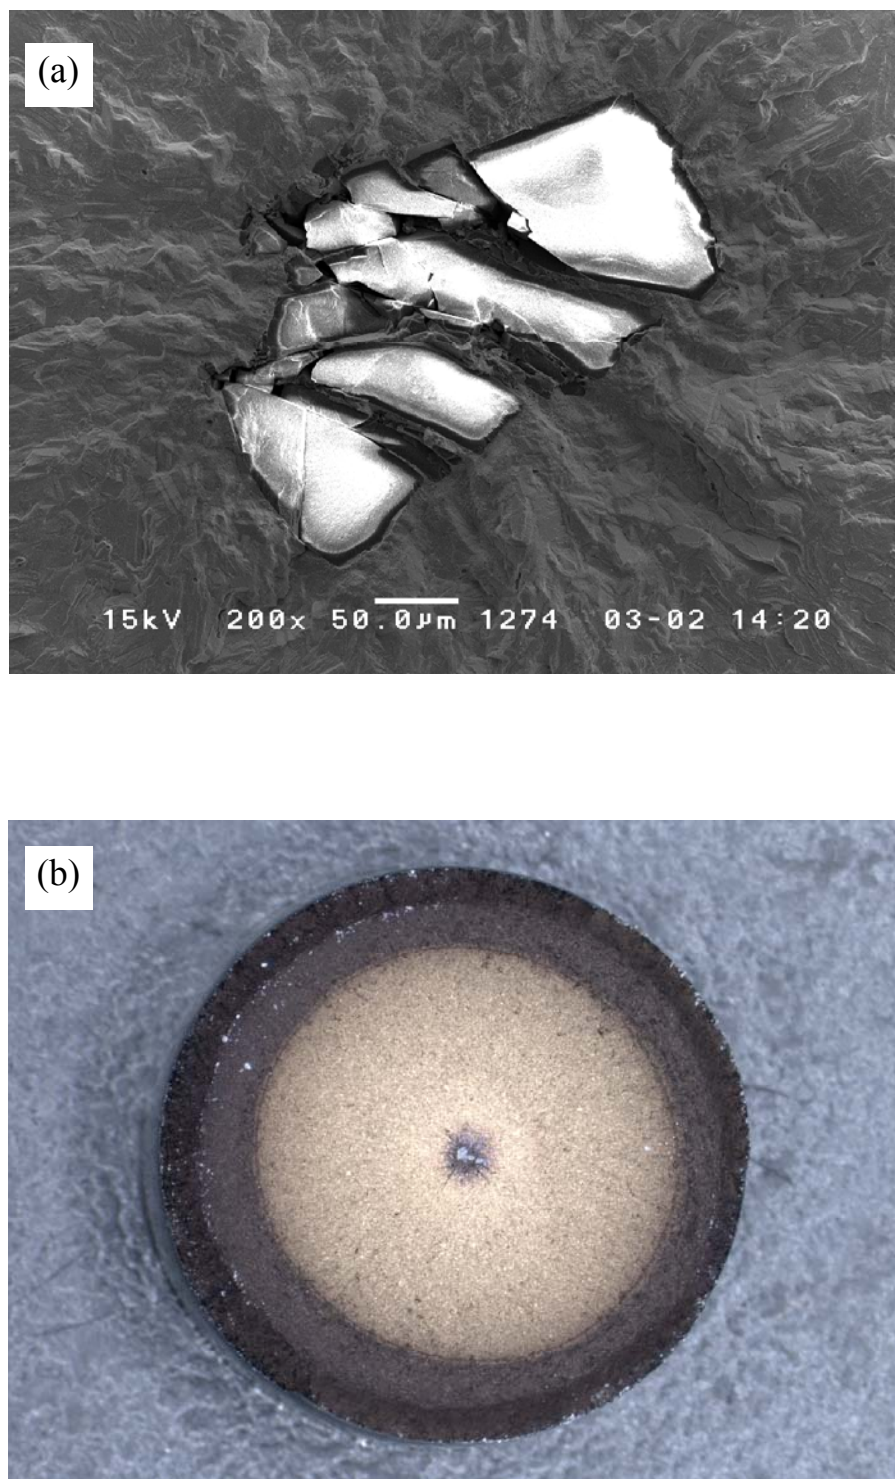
Fatigue fracture surface (a) SEM image of the surface crack initiation region in specimen SD1-L27 tested at 540 MPa. Inclusion size based on \sqrt{area} is 225 μm . (b) Internal initiation in seeded specimen SD1-L13 tested at 580 MPa giving a life of 7717338 cycles.
